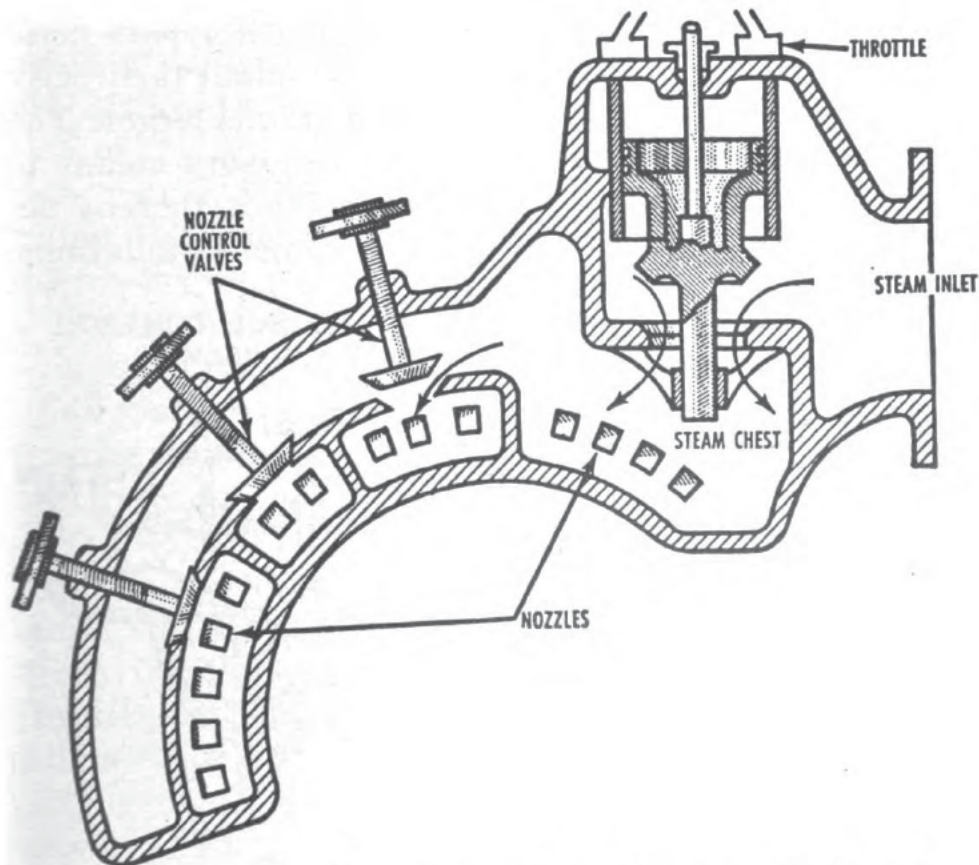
Diagrammatic arrangement of throttle and nozzle control valves.
